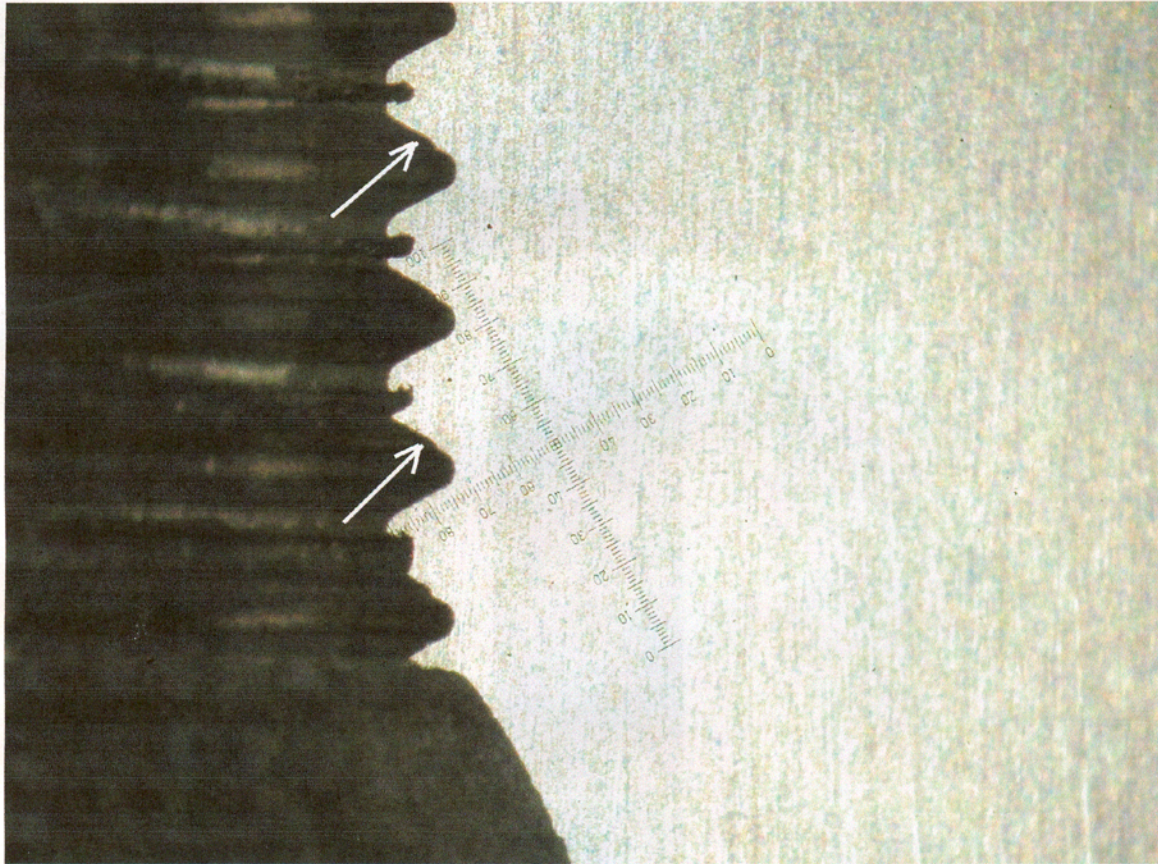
C01 shows the sectioned rocker thread at the bottom of the hole. It can be seen that in the bottom threads there is a small amount of thread distortion by brinelling of the adjuster into the rocker. This is the slight notch on the lower flanks marked by arrows. Thread distortion in this area is caused by the adjuster being driven into the rockerarm thread by heavy impact loading. This is commonly caused by uncontrolled or incorrect valve train behaviors. Examples include - 1) Forcing the system into coilbind or binding the retainer against the valve guide. 2) Severe spring surge or valve bounce which manifests itself as a resultant crash of the valve train components against each other as the system goes in and out of compliance and loft. This distortion causes stress risers and micro-cracks which can lead to failure such as is seen here.
